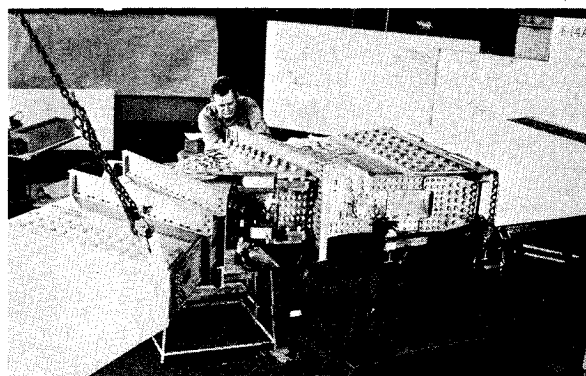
Early pivot bearing test specimen [note size (weight) and space requirements of bolted construction].
